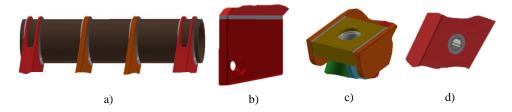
Welded connections of the lifter: a) rotary sleeve with swinging frame plate and lifter columns, b) lifter column with the tip, c) swinging frame plate with plate, d) lifter column with sleeve
